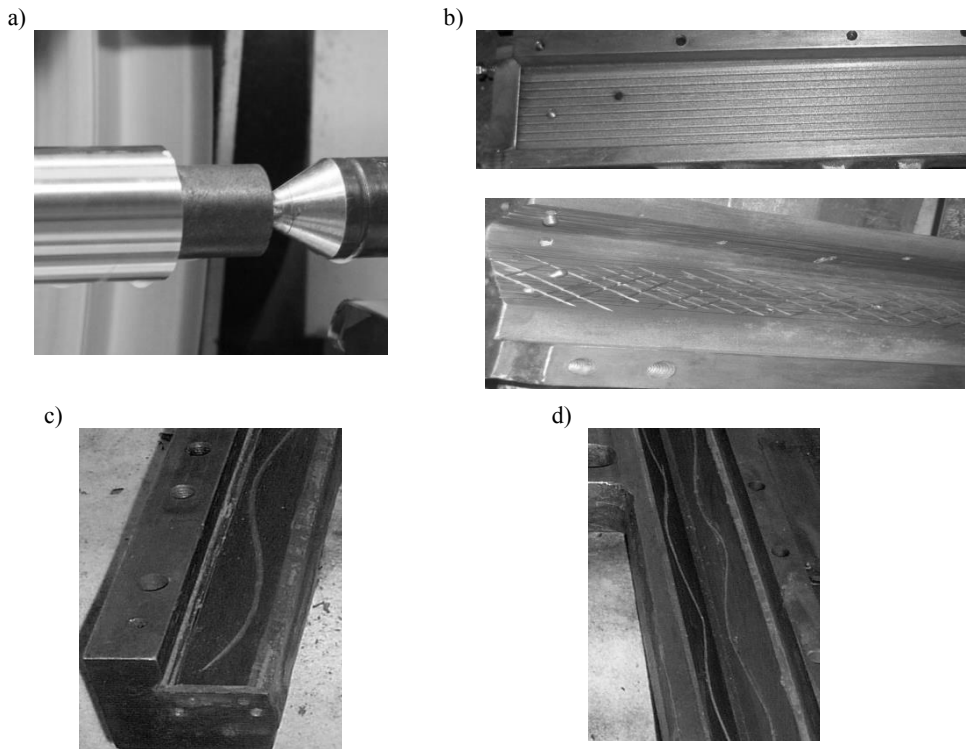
Finishing machining slide bearing pin (a), machine tool guide with lengthwise and crosswise scoring prepared for regeneration of (b), composite polymer regenerated flat guides (c), triangular guides (d) with lubrication grooves
